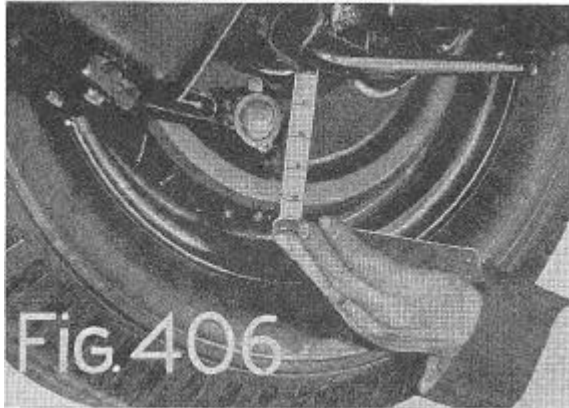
Distance from bottom of king pin boss to bottom of brake backing plate must be within the limits of 5 1/4 to 5 3/4 inches.
